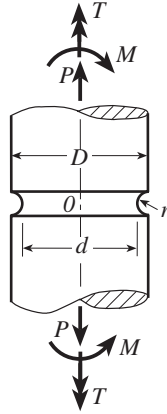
Grooved shaft subject to tension, bending, and torsion.
